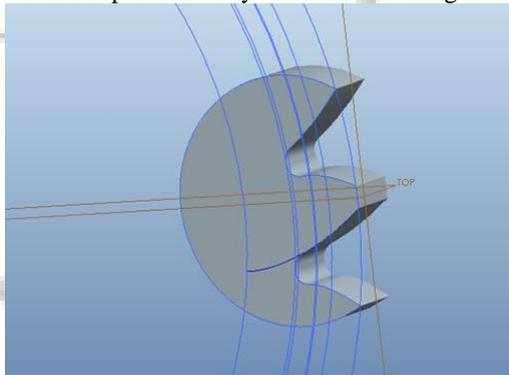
3-Dimensional model of an asymmetric gear tooth
